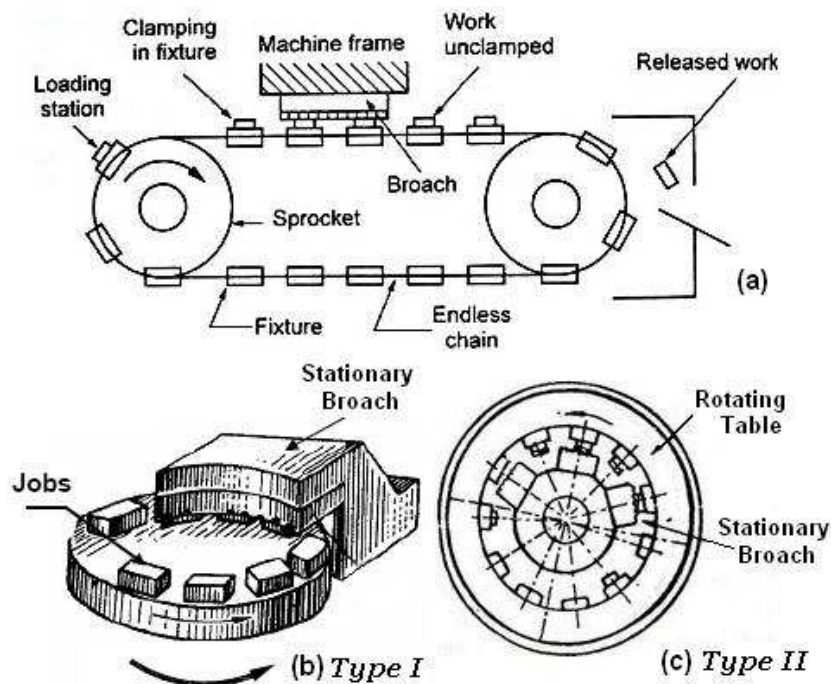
Continuous broaching machine (a) Horizontal type (b) and (c) Rotary type
